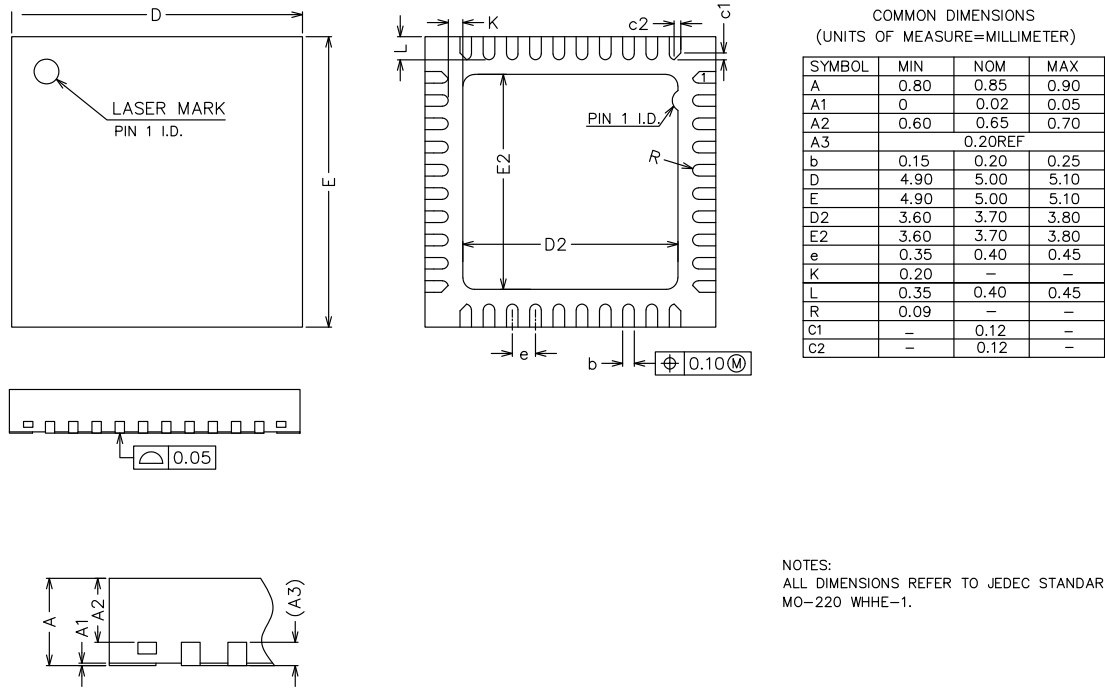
UC6580I-00 (QFN40 Industrial) Mechanical Dimensions
